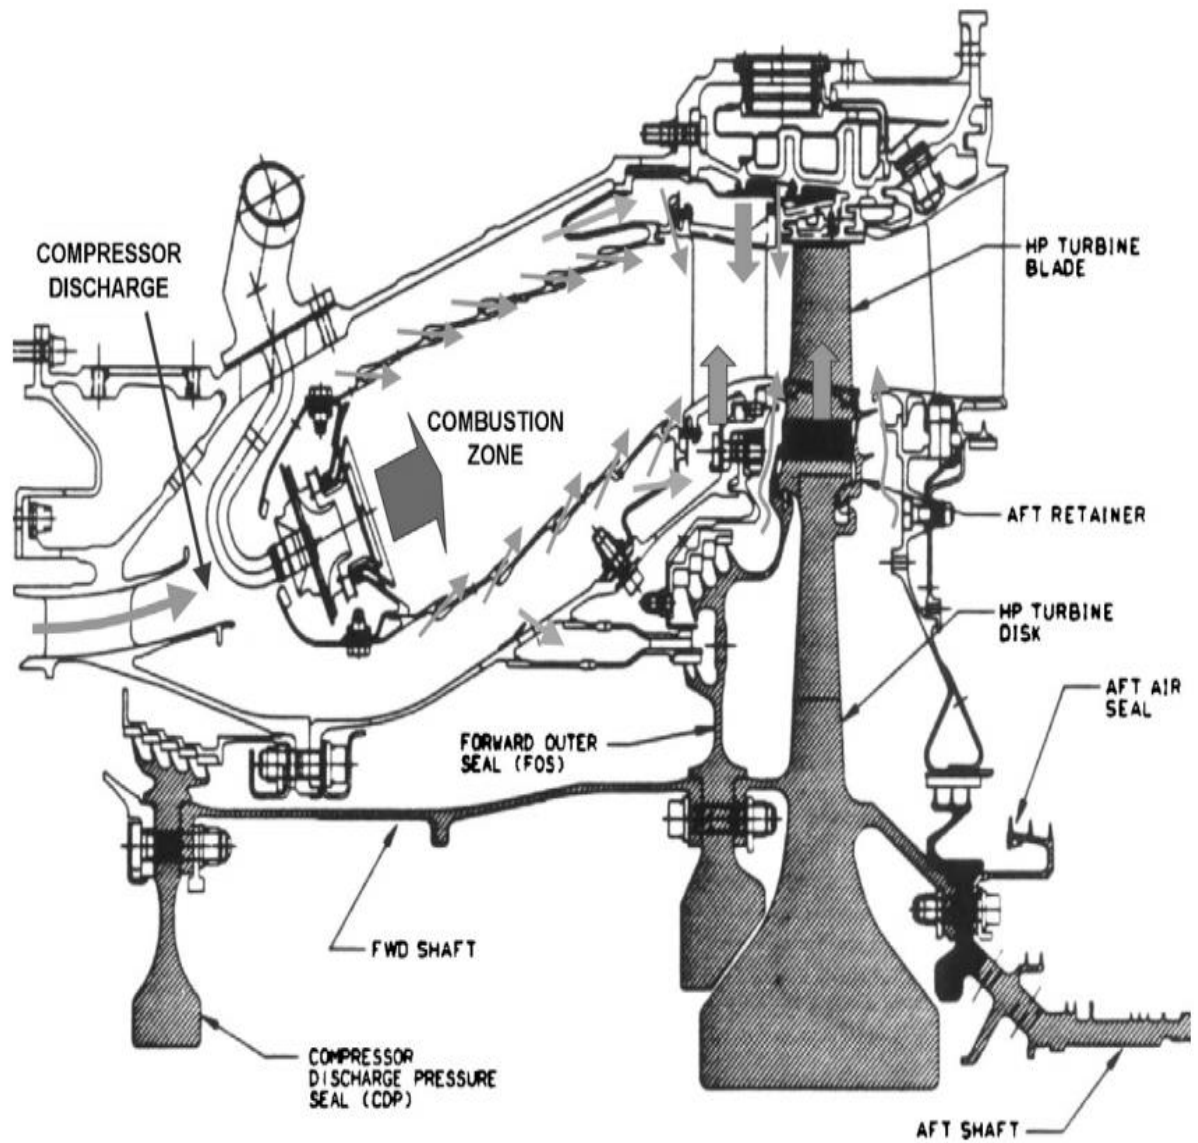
Cooling flows for a combustor and high-pressure turbine.
